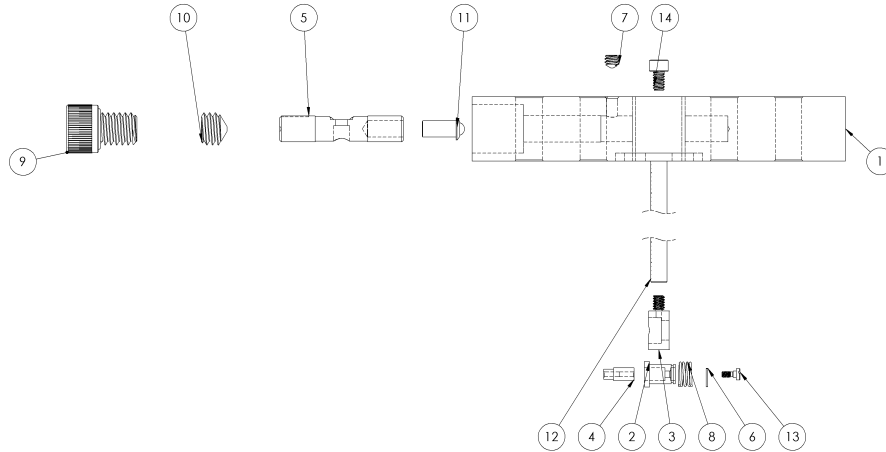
Exploded view of the improved design assembly. 1) Ultem plate attaches to the test section top plate. 2) Steel chuck holds the obstruction. 3) Steel bottom attachment holds the lower sub-assembly to the extendable rods. 4) Ultem obstruction. 5) Steel top rod. 6) Steel retaining ring. 7) Brass set screw keeps the top rod from rotating. 8) Chuck spring accounts for thermal expansion in the test section and maintains obstruction-window contact. 9) Sealing socket head screw. 10) Cone-point set screw fine tunes axial position of the top rod. 11) Spring plunger creates opposing force to the cone-point set screw. 12) Stainless steel extendable rods. 13) Precision shoulder screw draws the obstruction into the chuck. 14) Vented screw secures the extendable rod to the top rod.
